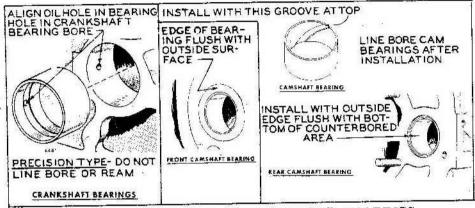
CRANKSHAFT AND CAMSHAFT BEARINGS
